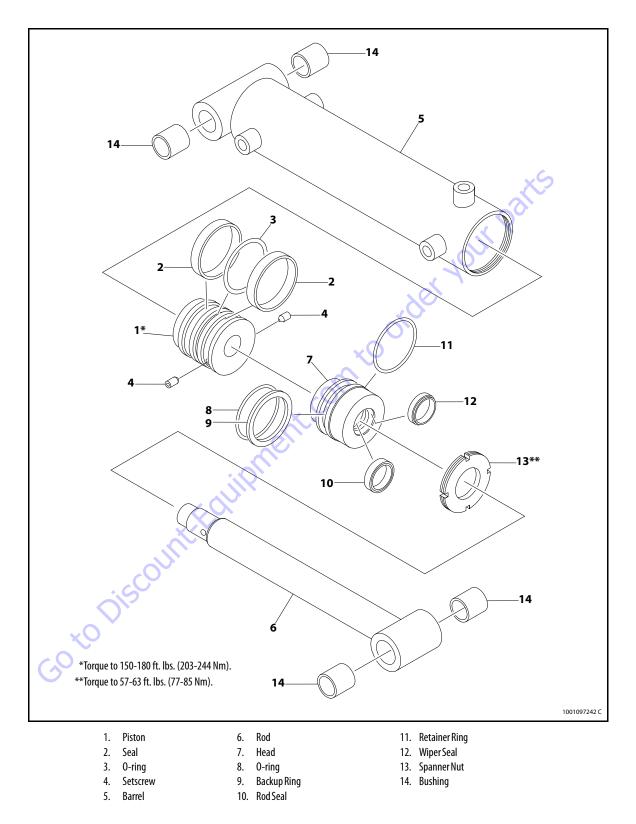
Steer Cylinder (USA Built Machines, SN 0300142635 through 0300171769 & China Built Machines, SN B300000100 through B300000969)
